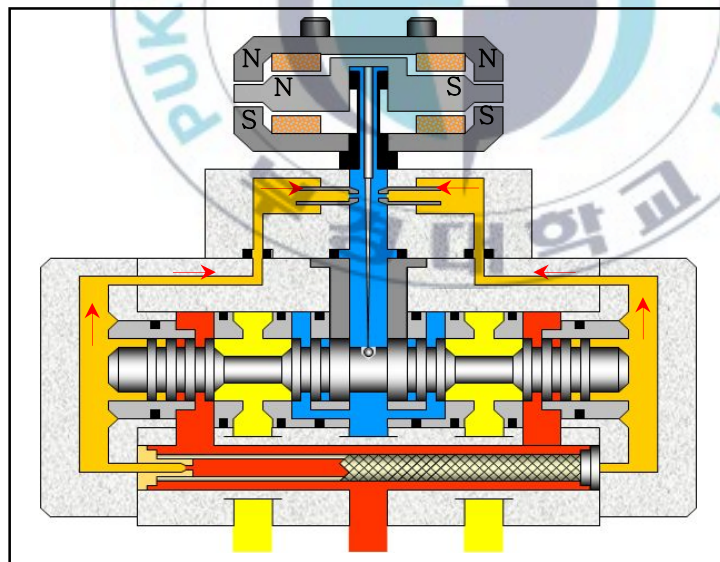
Schematic of torque motor and nozzle-flapper
